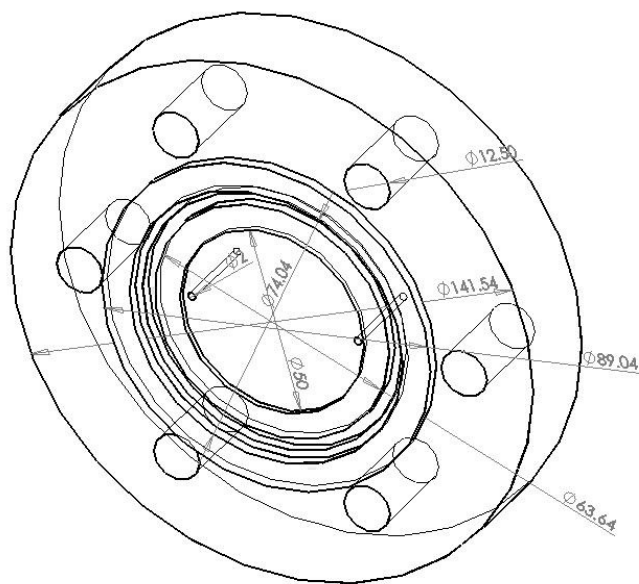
Trimetric view of the feed/retentate side plate of the membrane holder (The feed side plate had two equidistant holes, one for feed to enter and other to be used for feed rejection during air bubble removal)
